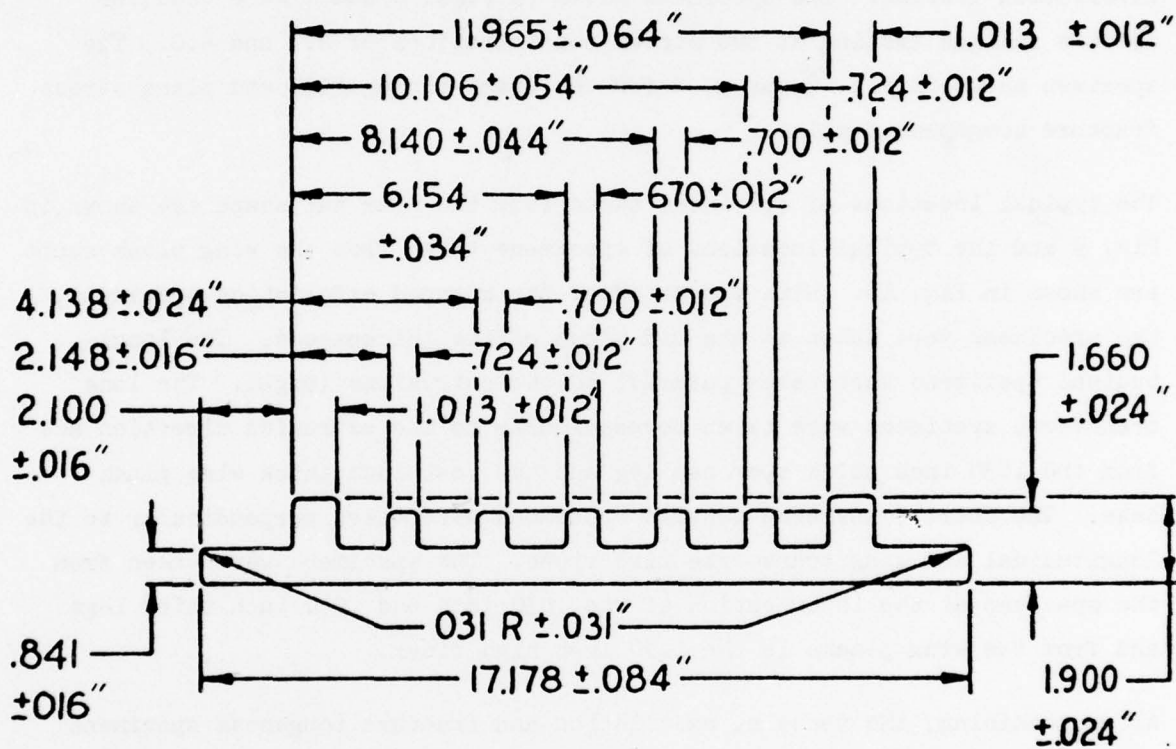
P-3 Extruded Wing Panel Shape, LS 9782
